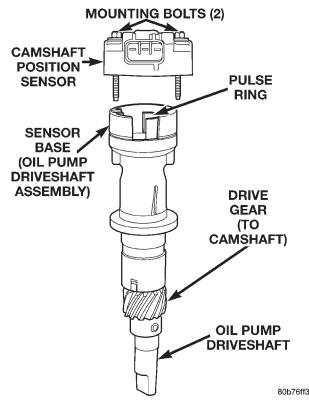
CMP and Oil Pump Drive Shaft—4.0L Engine OPERATION
